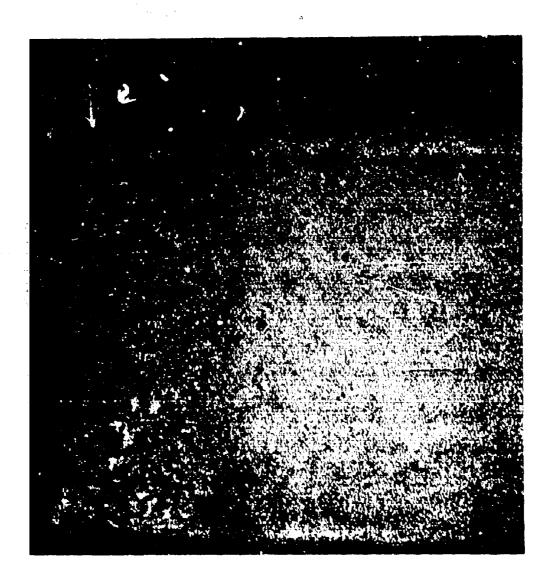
Welded Specimen A-1 After Tensile Test. Specimen Macroetched to Show Location of Rupture. (Environmental-test conditions: 800F, 117 ksi, salt; duration: 63 cycles) (XP-2172-2) Etchant: Villela's Reagent Mag: 20X
